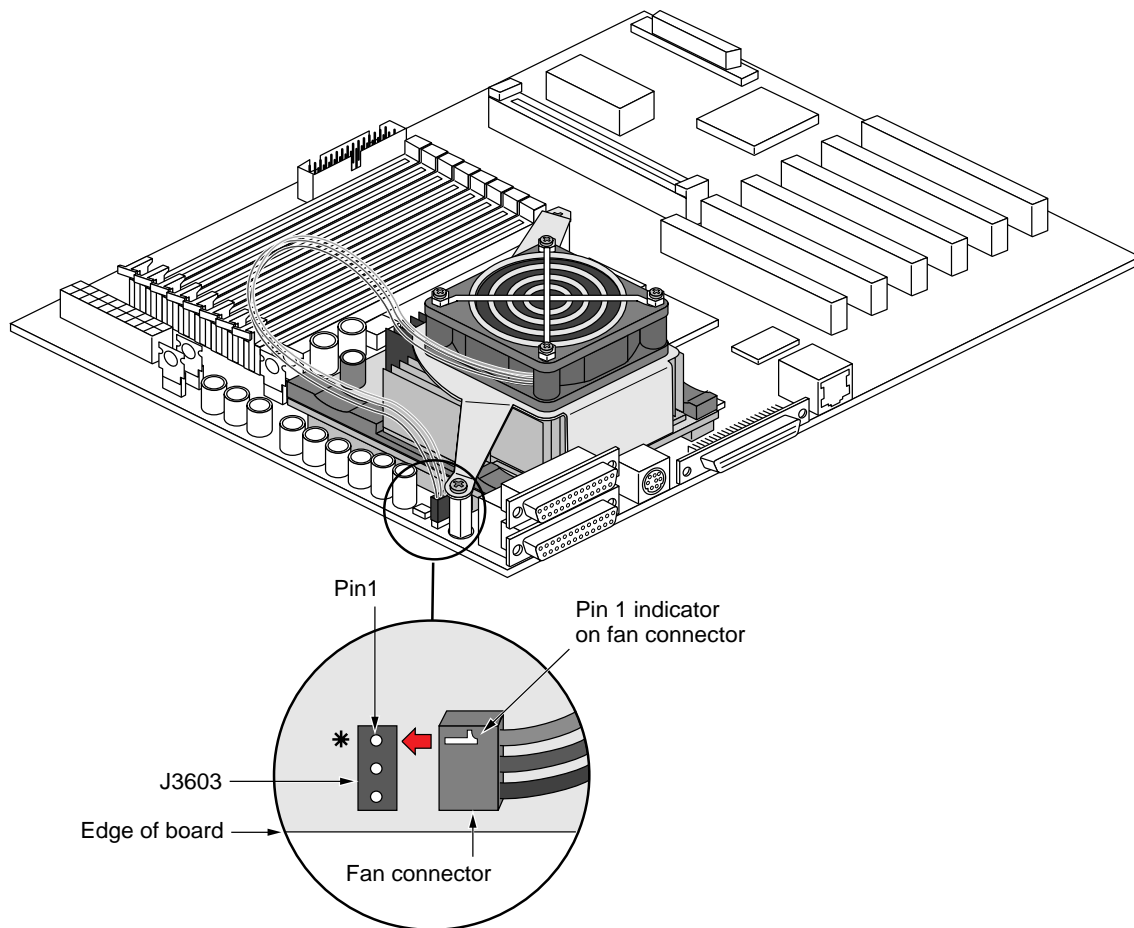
Hooking Up the CPU Fan Power Supply Wires to the J3603 Header
